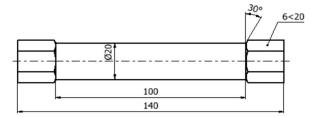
Dimensional and shape conditions of the sample for static torsional tests (dimensions are given in [mm])
